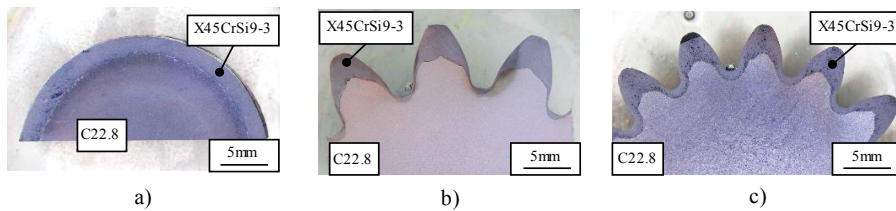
Macrostructure of the interface zone in the clad workpiece (a) and in forged bevel gears at position A (b) and position B (c) in transversal cross section.
